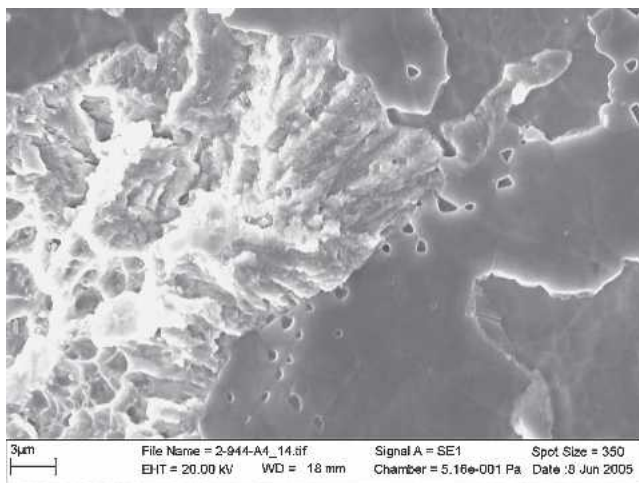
Secondary fatigue crack at an MnS inclusion with ductility dimples between the primary and secondary cracks. The primary fatigue crack arrived from the left. At the border of the MnS, the secondary fatigue crack can be seen. The lower left corner shows ductility dimples from ductile linking of primary and secondary fatigue cracks.
